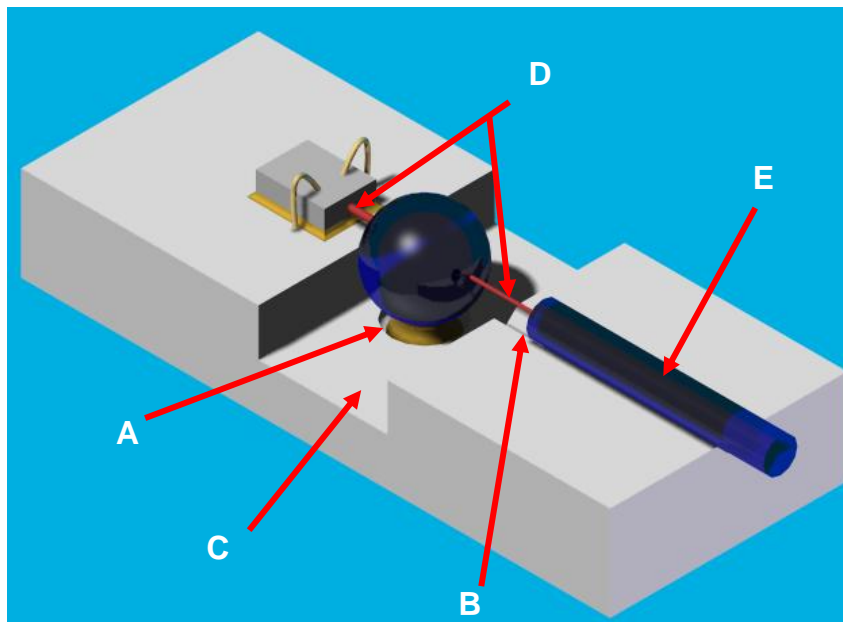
Applications of laser machining in optoelectronics' manufacturing. (a) laser machined lens alignment and bleed control circular recess with vertical side walls, (b) laser
